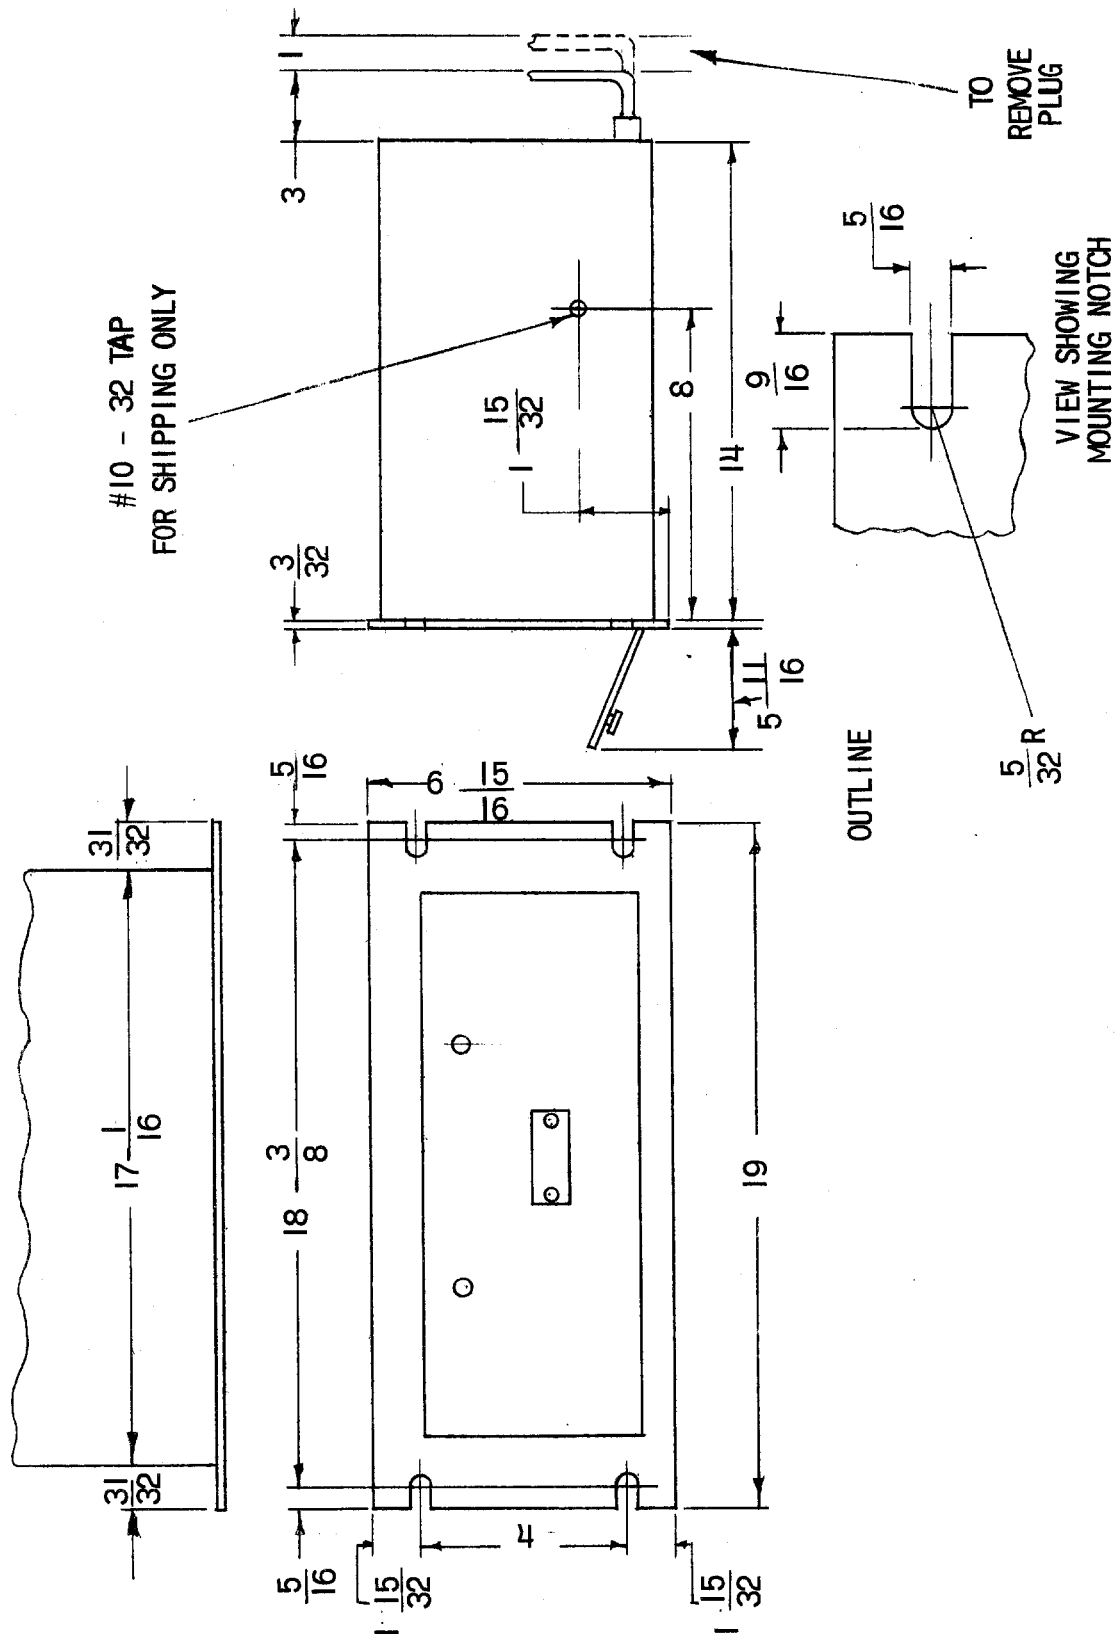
(0227A2037-0) OUTLINE AND MOUNTING DIMENSIONS
